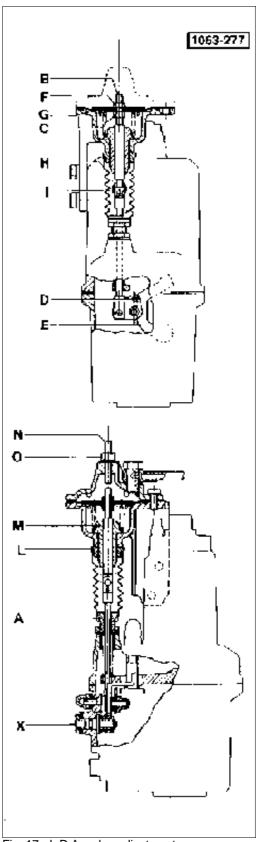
L.D.A. valve adjustment. SILVER 100.4
